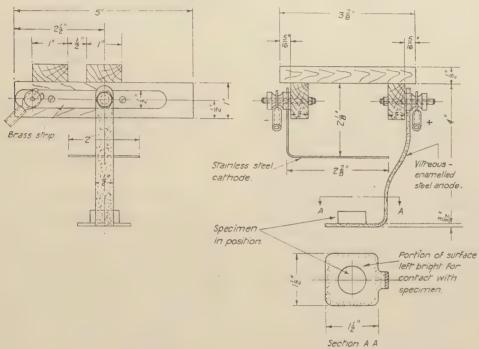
Upright views of horizontal-platform type of polishing head, complete with specimen
